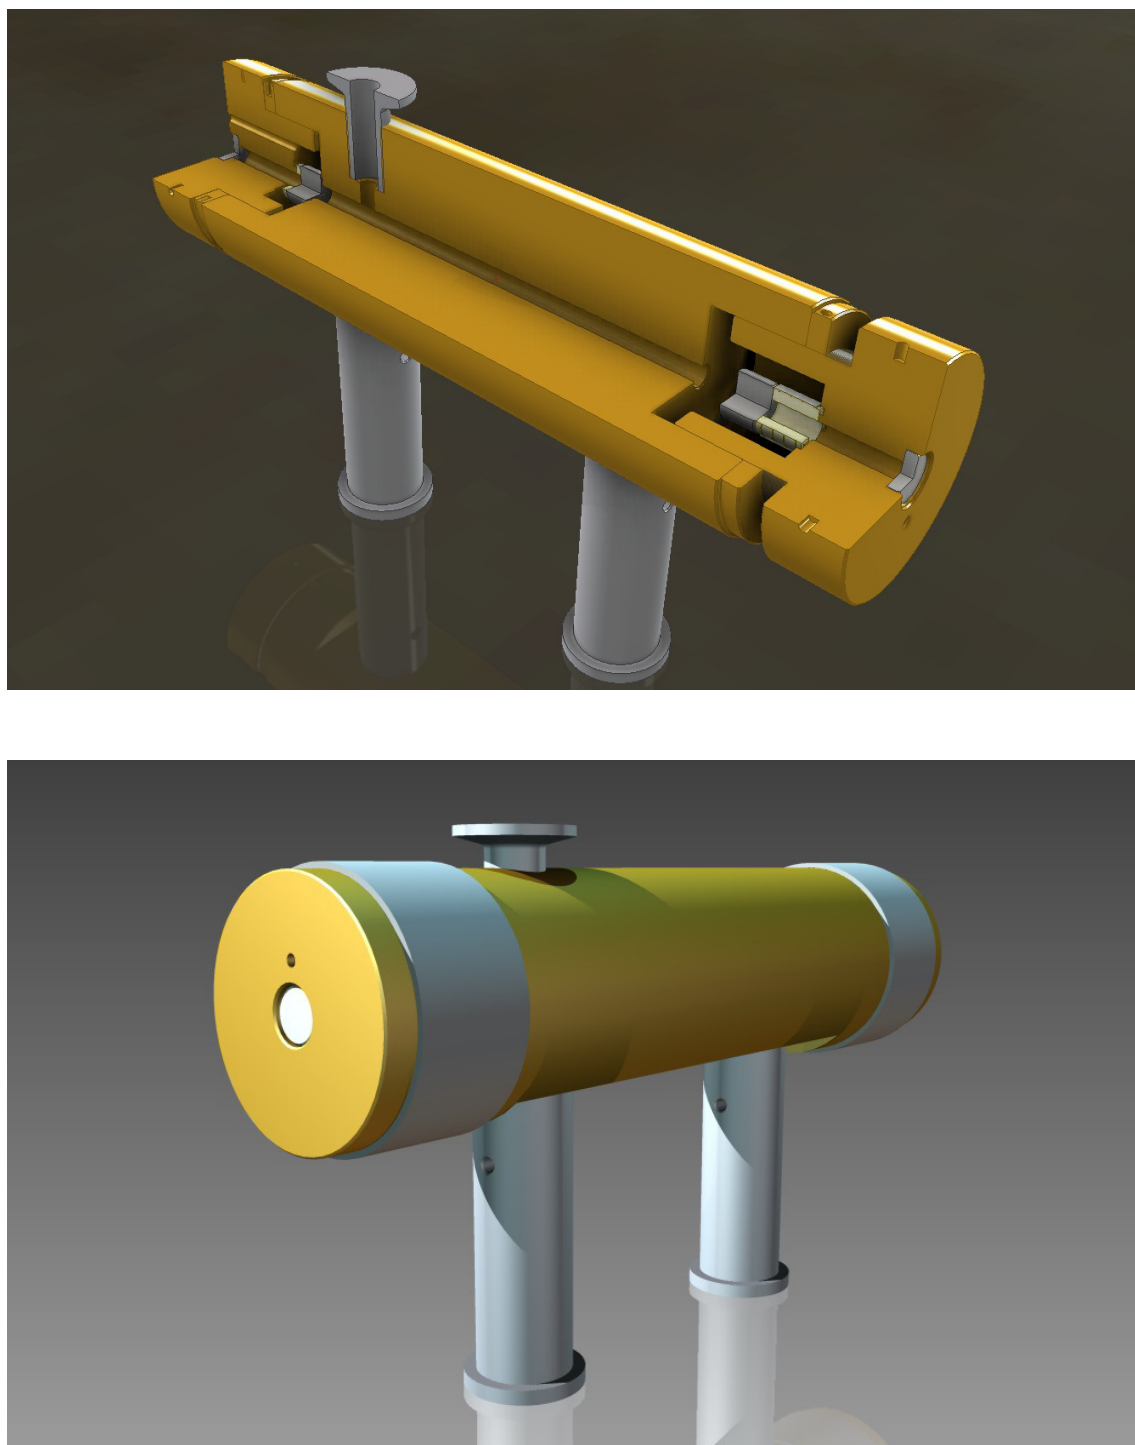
Quarter-section and exterior views of assembled scanning cavity. The exterior view also shows the aluminium vacuum sealing rings which are not currently in use.
